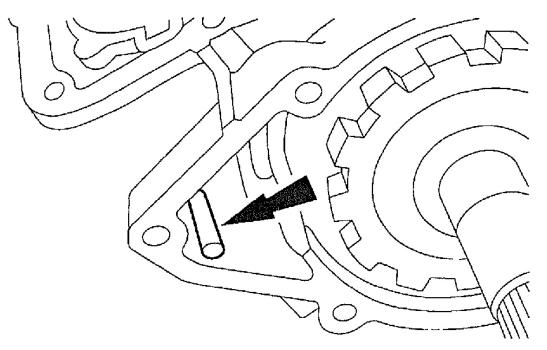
Removing Low/Intermediate Sun Gear Bearing
